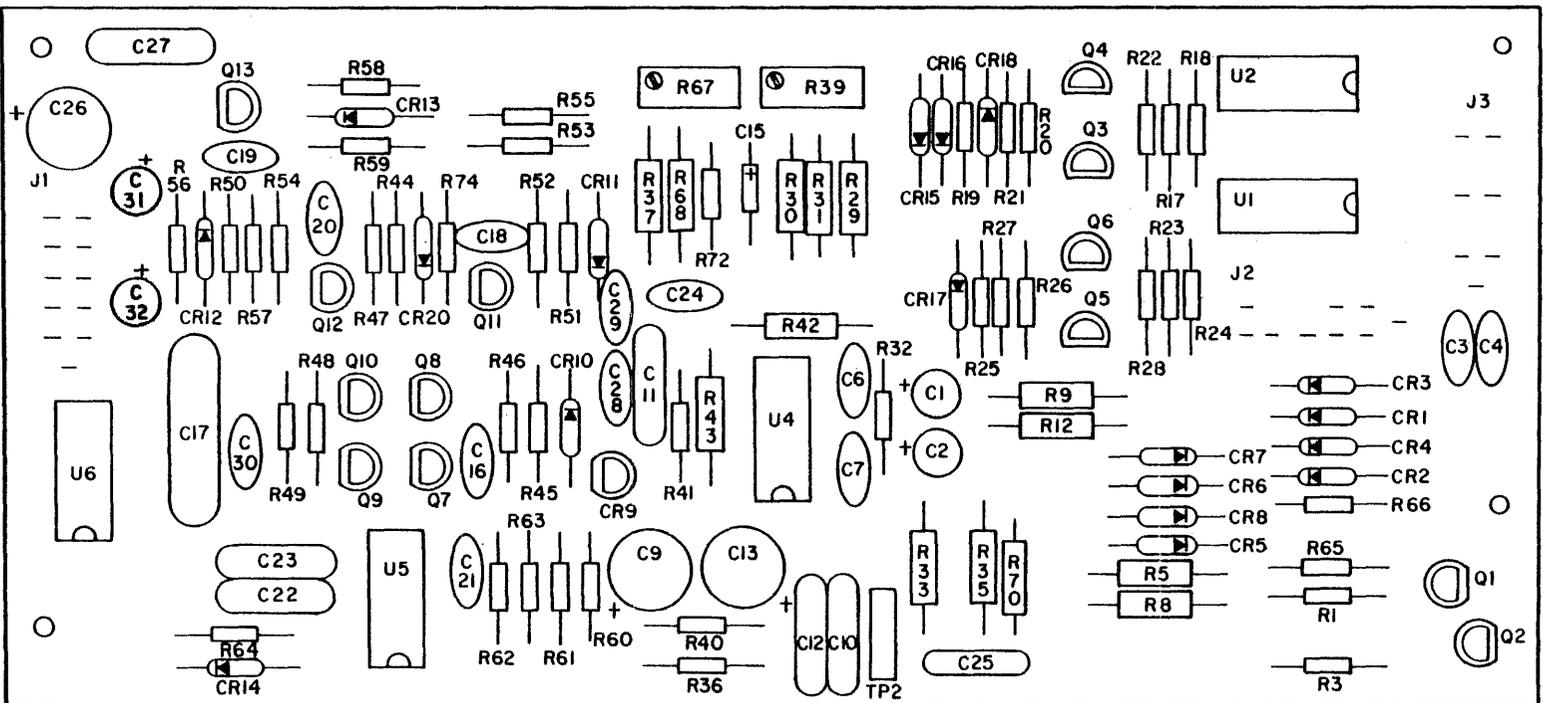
12 IPS READ/WRITE ASSEMBLY
